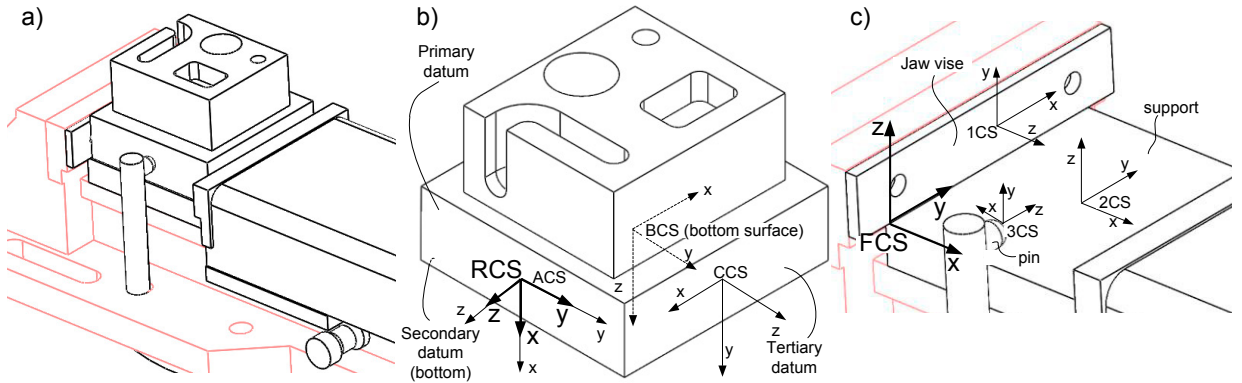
a) Example of part and conventional vise assembly. Notation of surfaces used in model derivation: b) workpiece; c) fixture.
